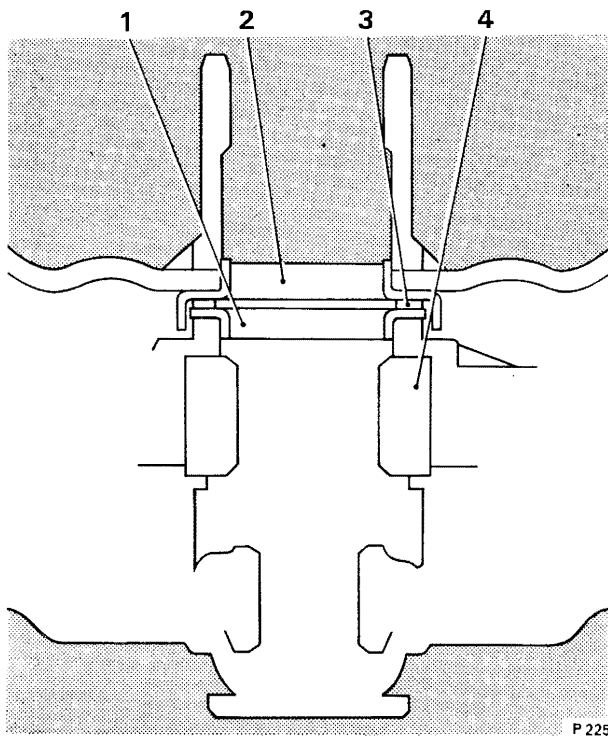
TORQUE CONVERTER—INTERNAL BEARING ARRANGEMENTS
